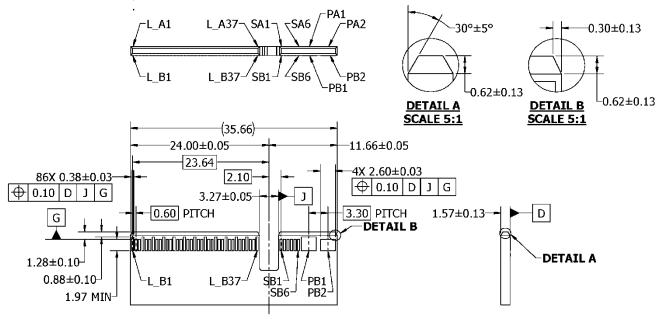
Plug Paddle Card for Combo x8+21A Power Plugs
